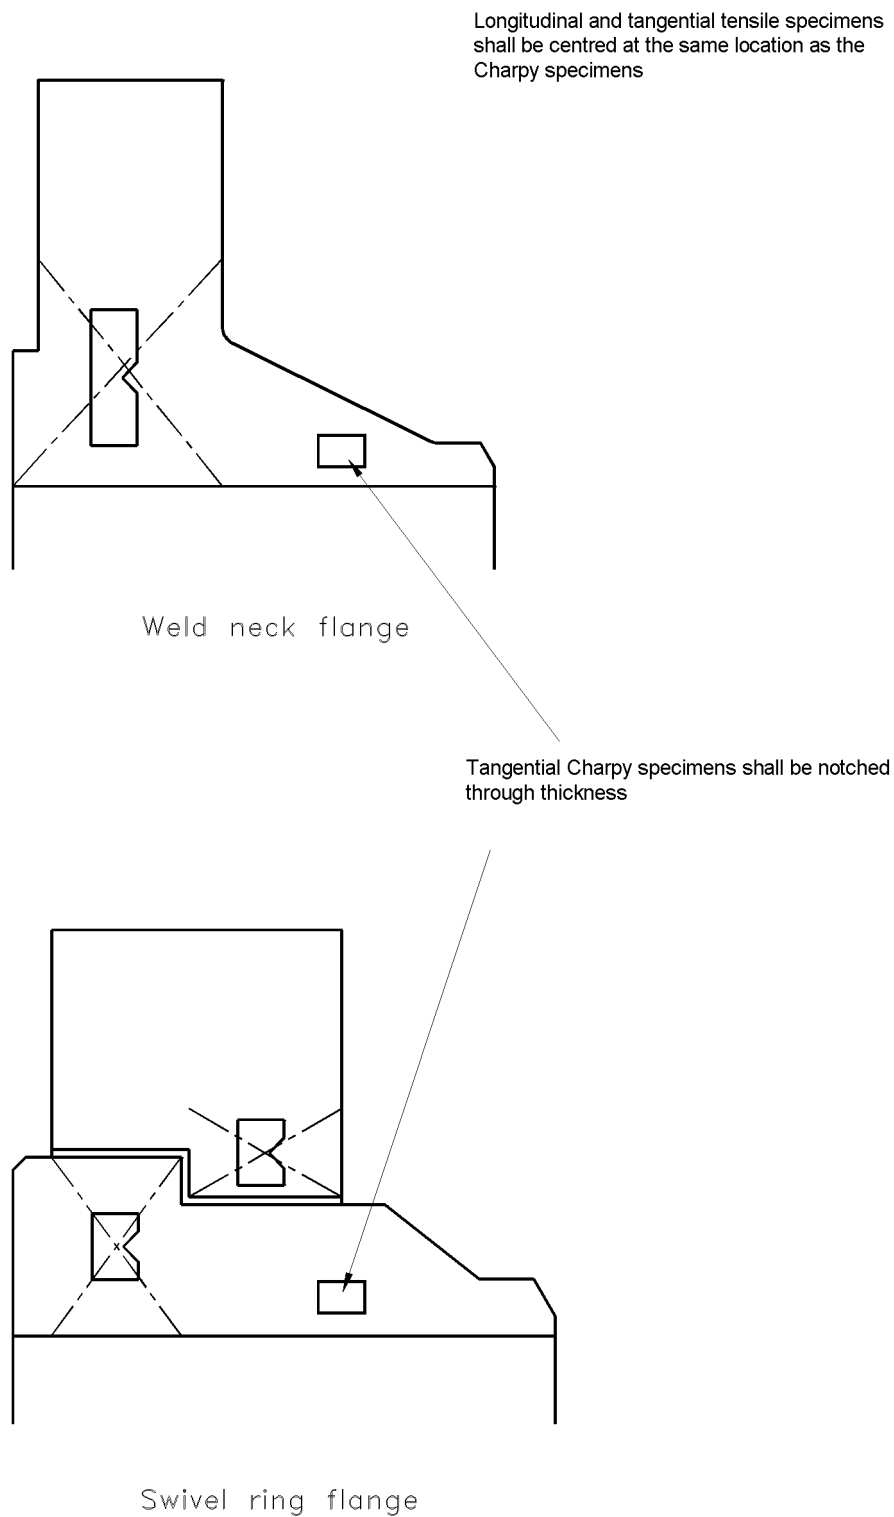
FIGURE B SCHEMATIC SECTION SHOWING LOCATION OF CHARPY AND TENSILE TEST SPECIMENS FOR APPROVAL TESTING OF ANCHOR FLANGES
